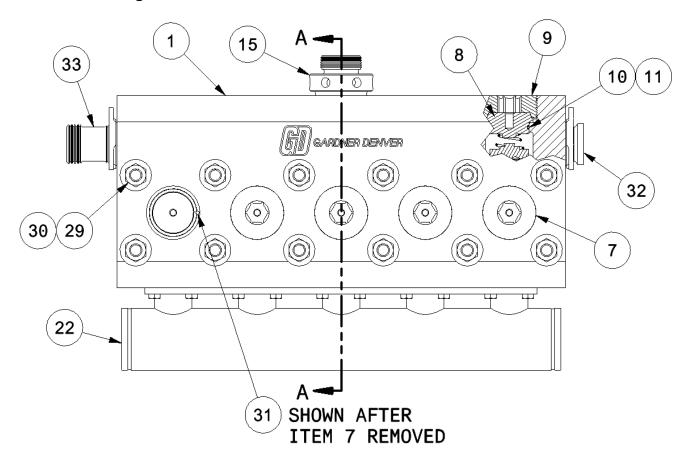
FLUID END ASSEMBLY 3.5" - 4.5" FRONT VIEW 301FWQ997 Page 5
